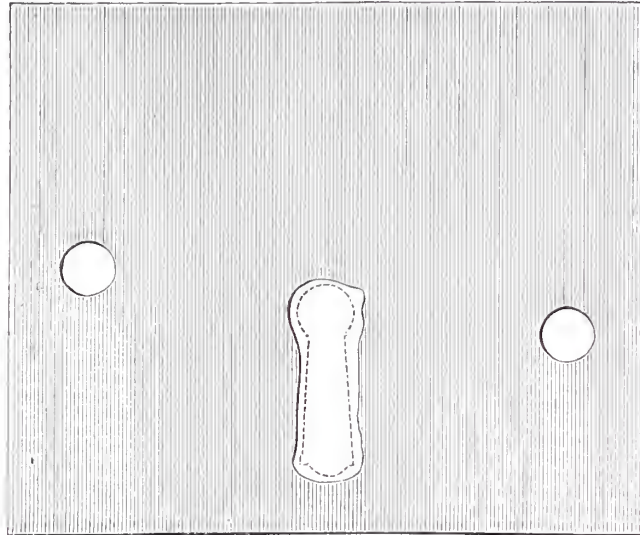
Covering Plate of Lock showing Worn Keyhole.
